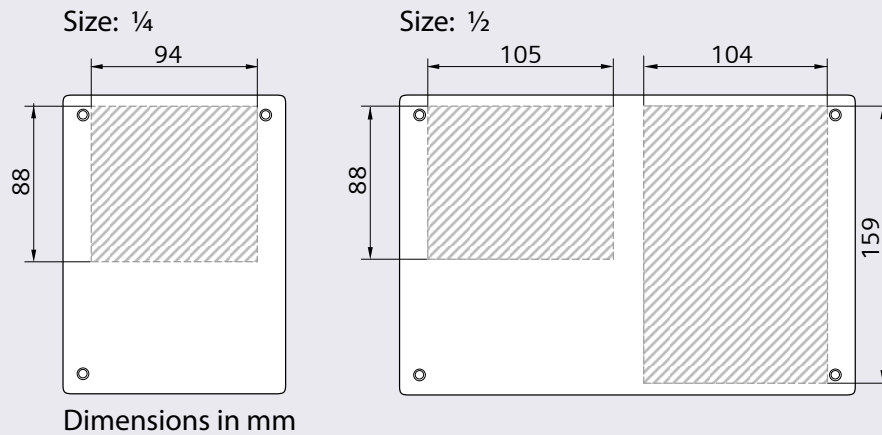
/9: Front areas usable for an instrument board for small withdrawable units with a mounting height of 200 and 300 mm
